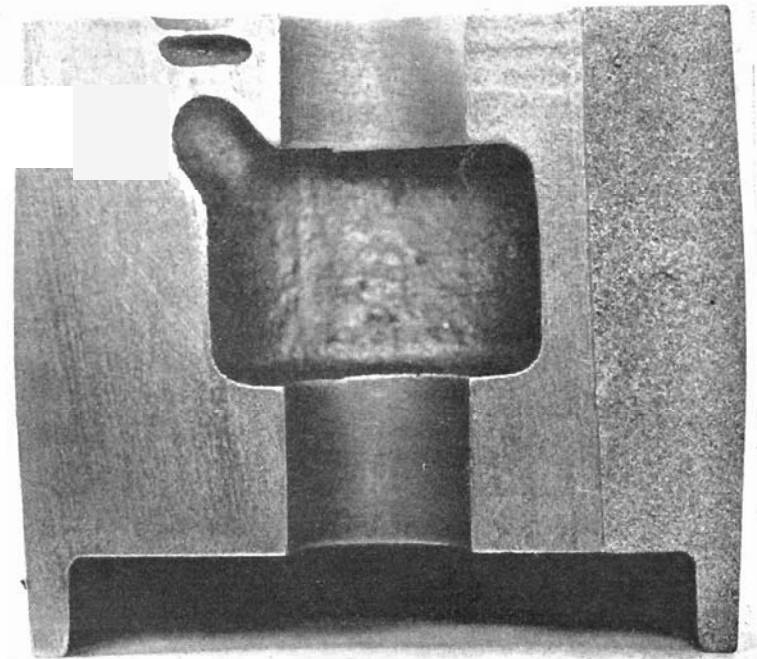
Large blowholes produced in a grey-iron pulley wheel casting by gas evolved from a core.
